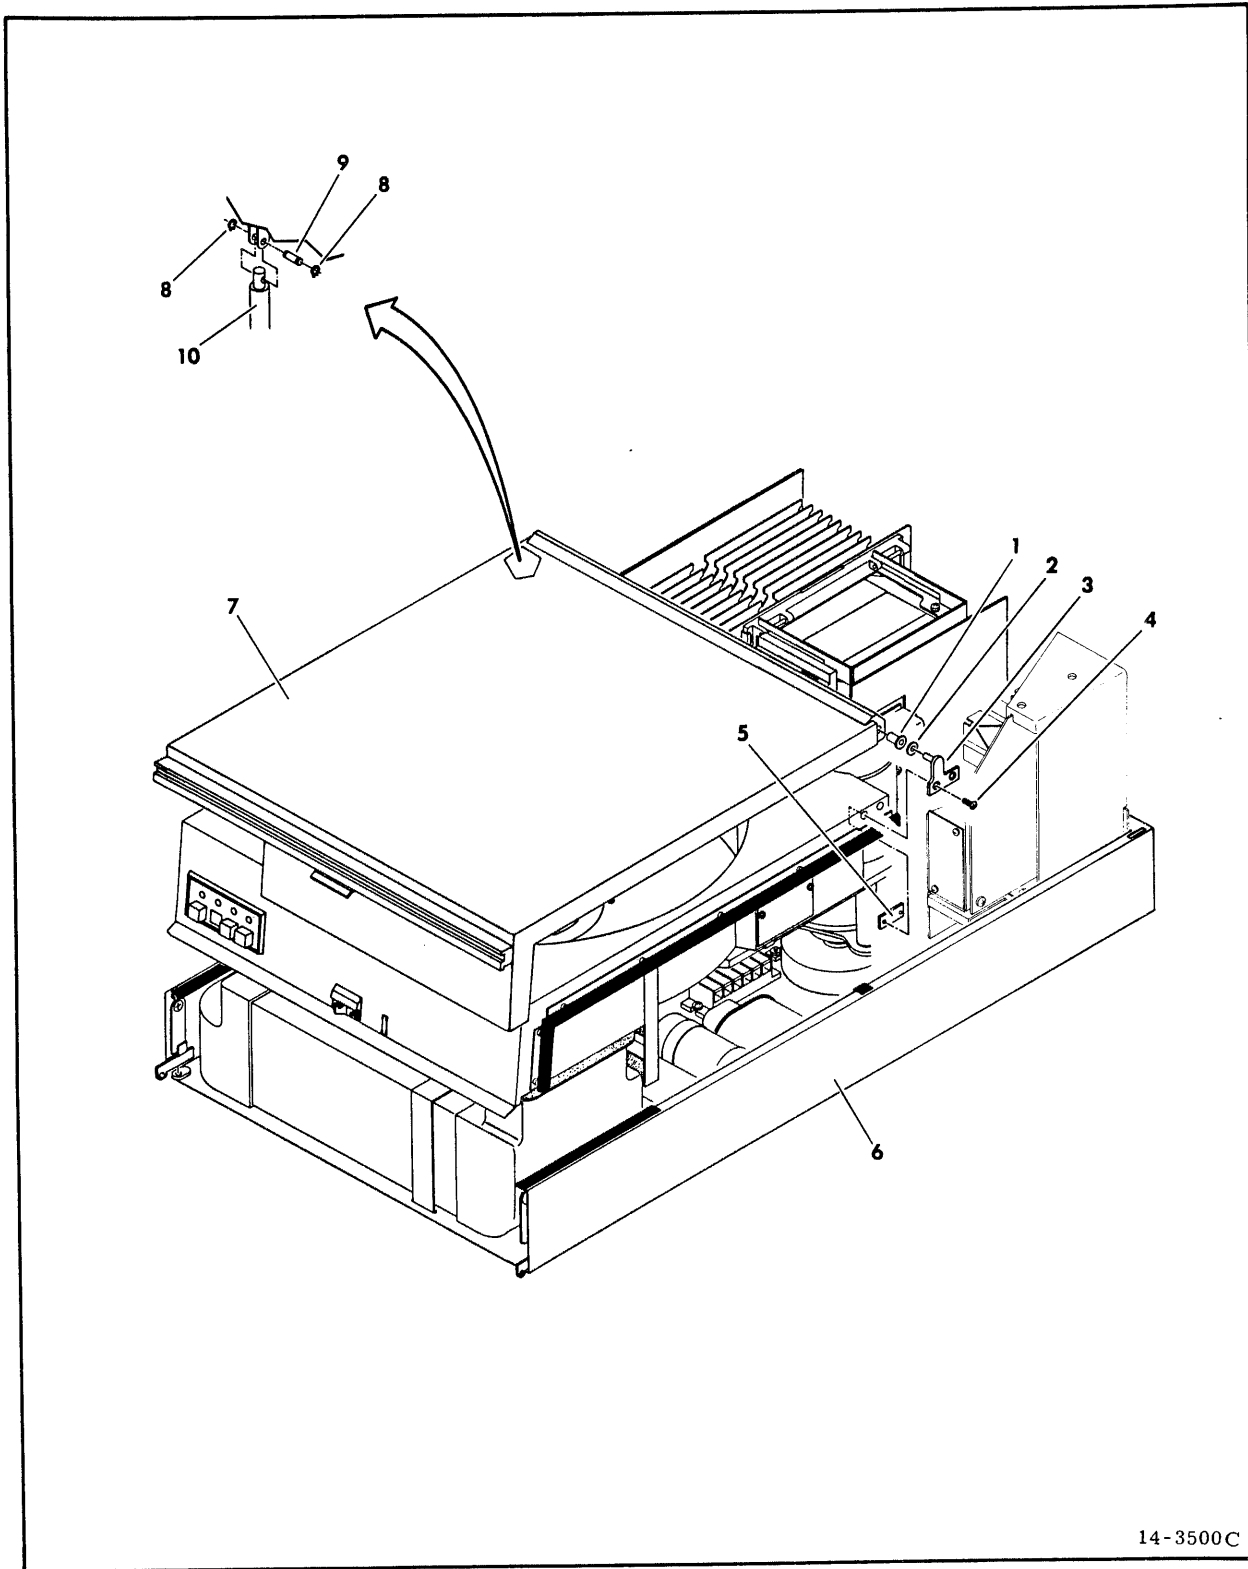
Final Assembly - 36 Inch Rack Mount
